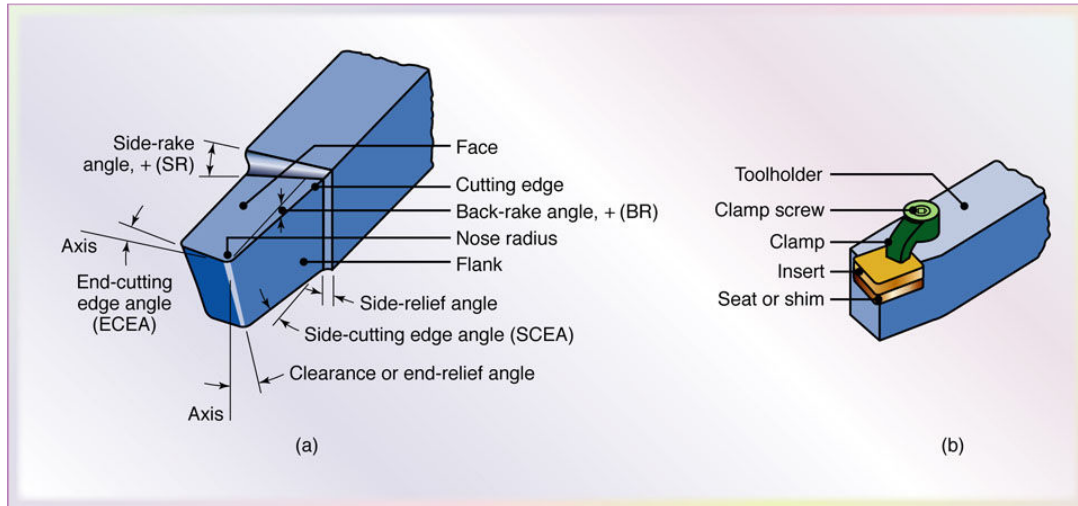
(a) Schematic illustration of right-hand cutting tool. Although these tools traditionally have been produced from solid tool-steel bars, they have been replaced largely with (b) inserts made of carbides and other materials of various shapes and sizes.
